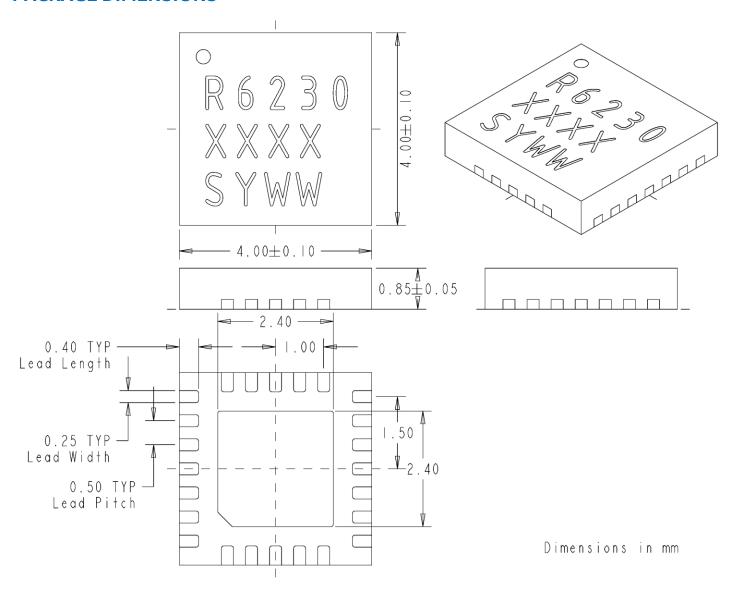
ER6230QI Package Dimensions (Lower Image is Bottom View)
